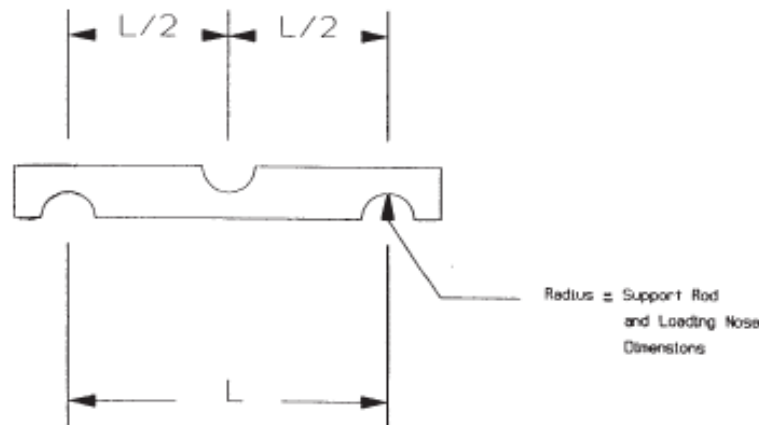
Fixture Used to Set Loading Nose and Support Spacing and Alignment
